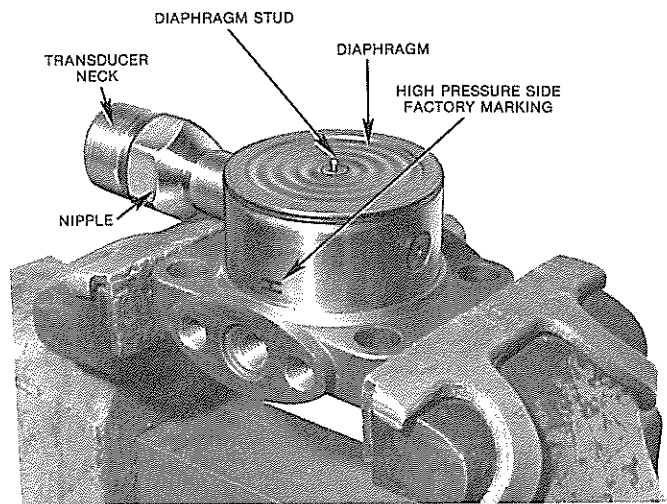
Transducer Resting on Flange (with Top Flange Removed) A8467
